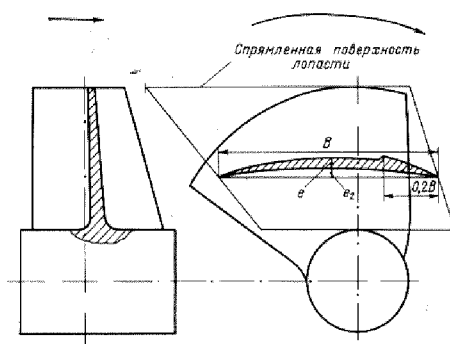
Blade geometry drawing of ventilated waterjet impeller blade [18]
